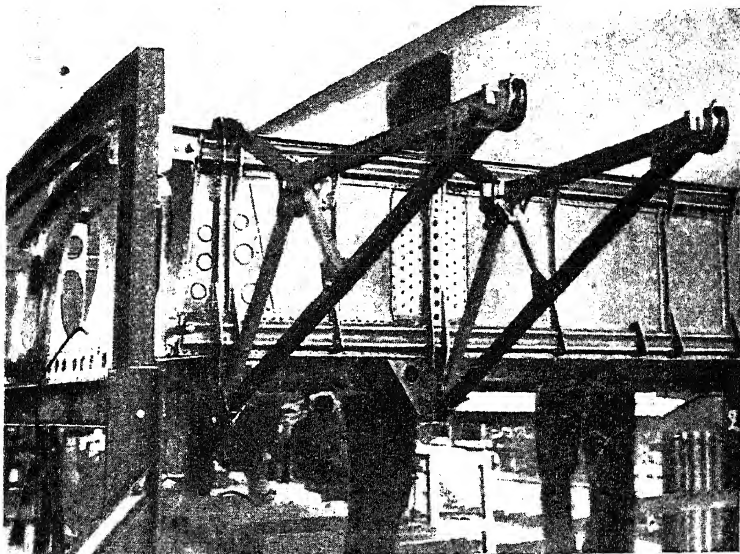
FIAT G.2—OUTBOARD ENGINE MOUNTING
